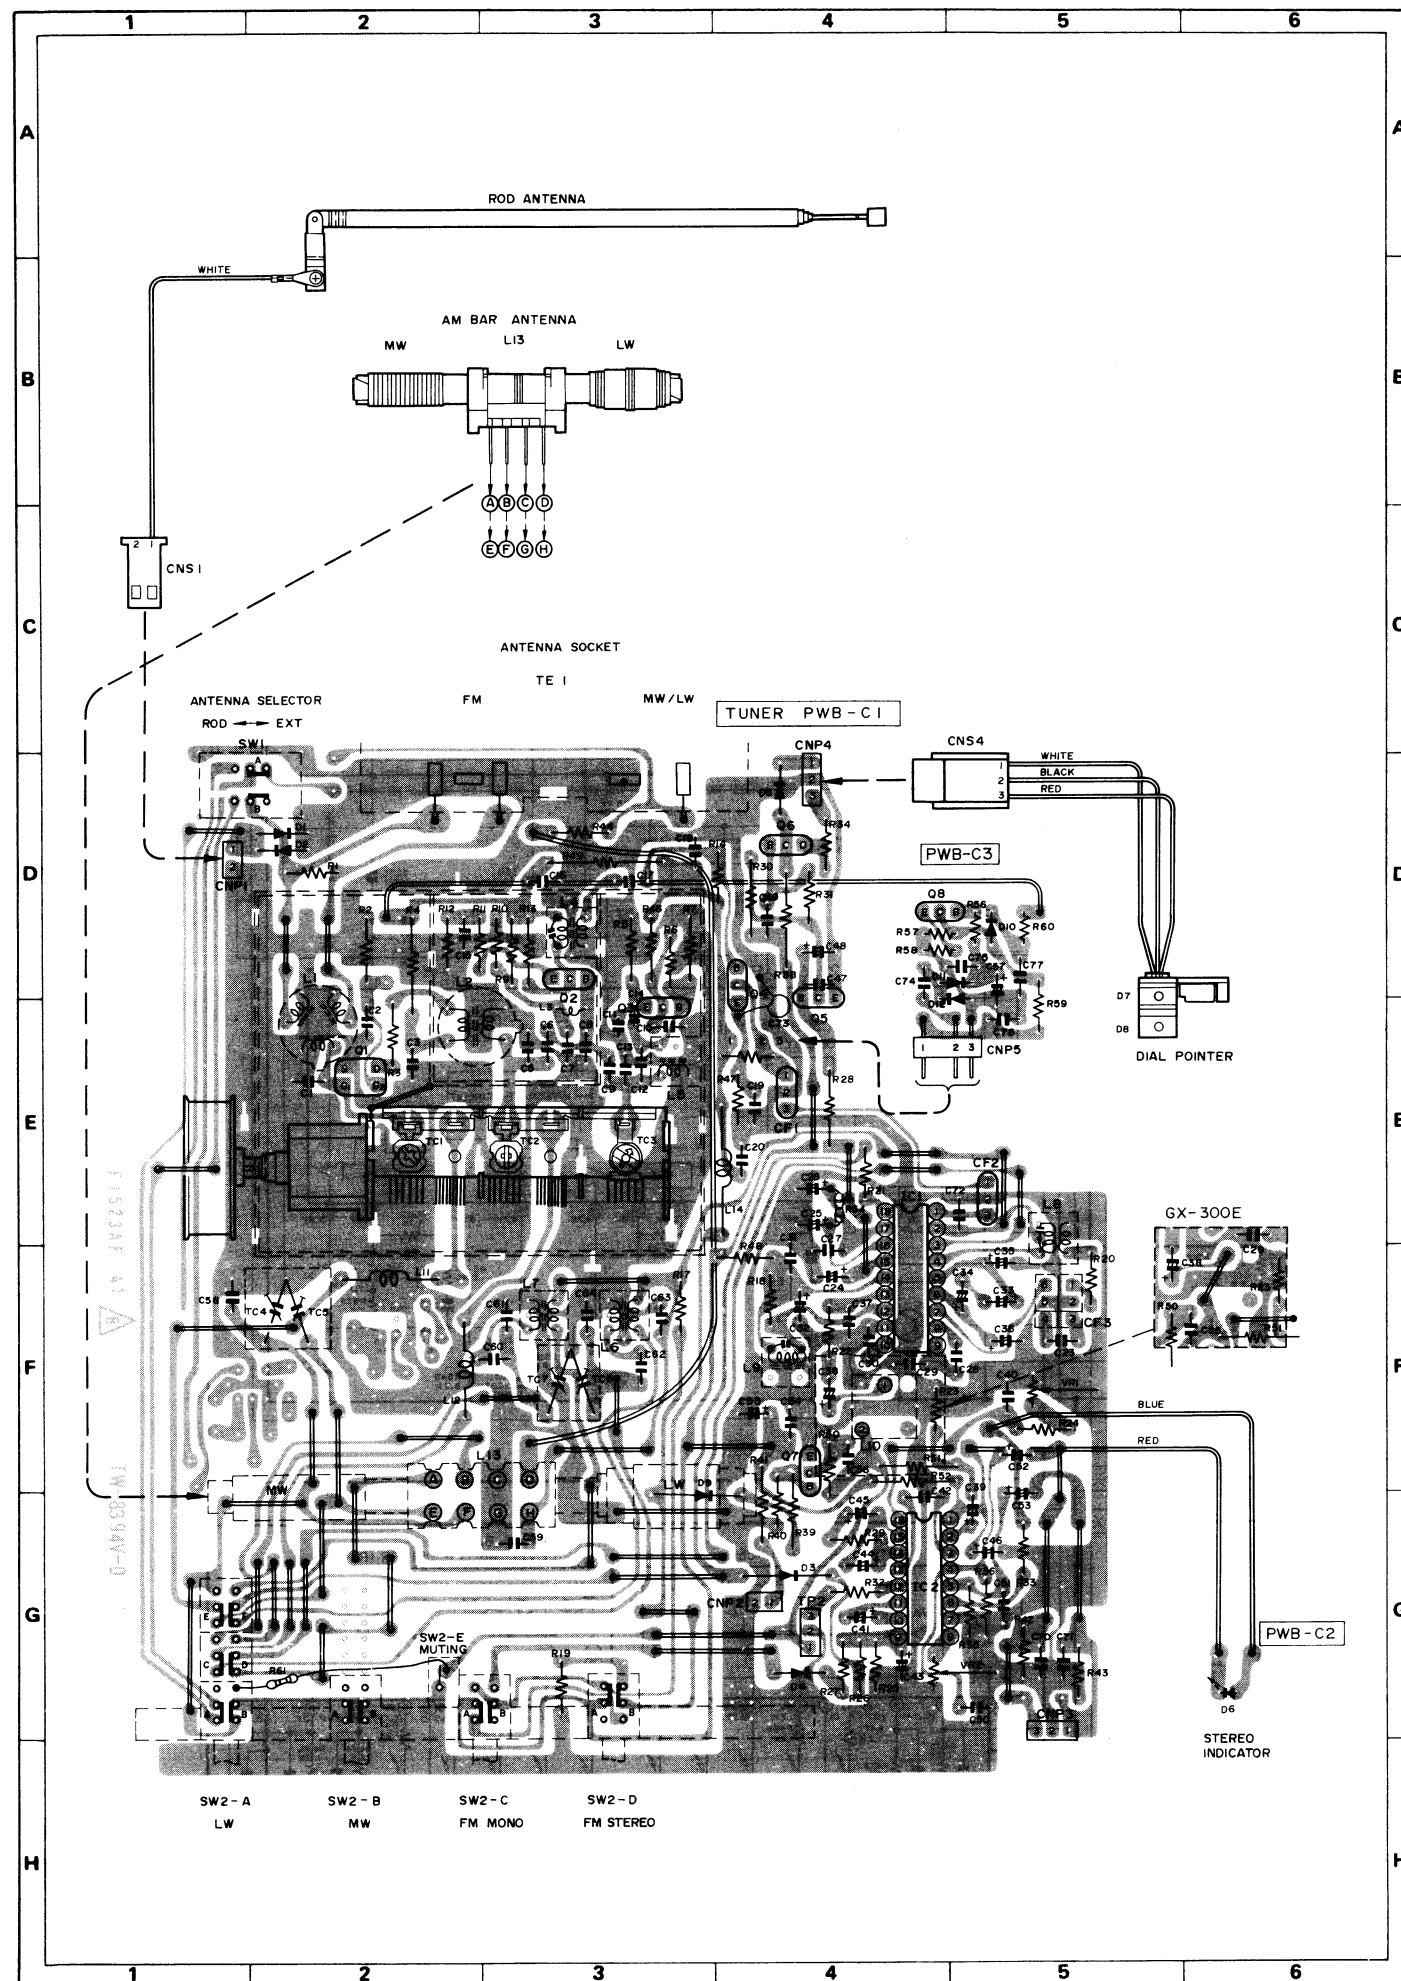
WIRING SIDE OF P.W. BOARD (1/3)
